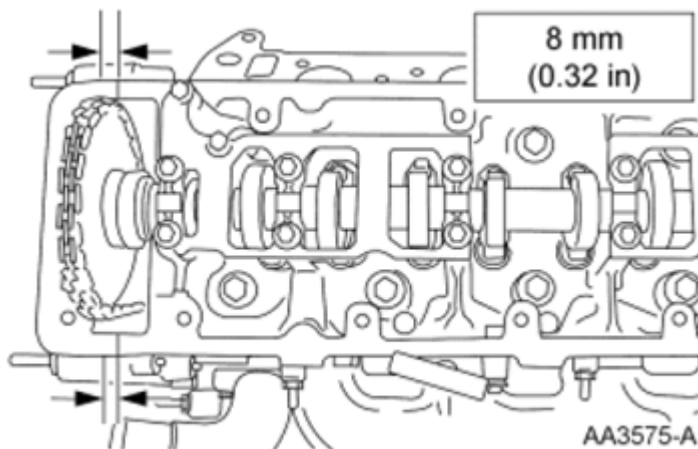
Identifying Engine Front Cover And Cylinder Head Sealant Apply Area With Specifications
